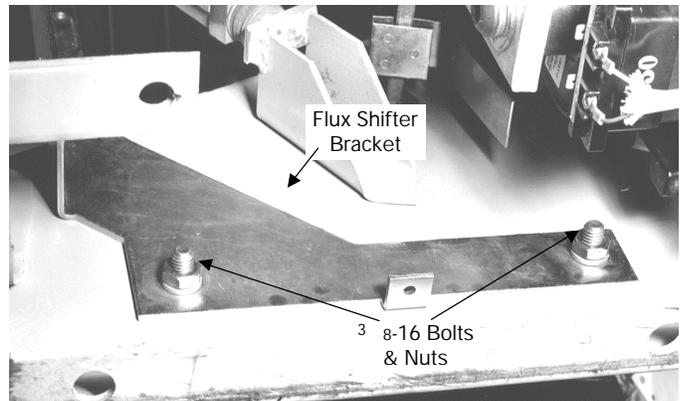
Flux shifter bracket installed on the front frame (view from underneath with breaker reassembled).
